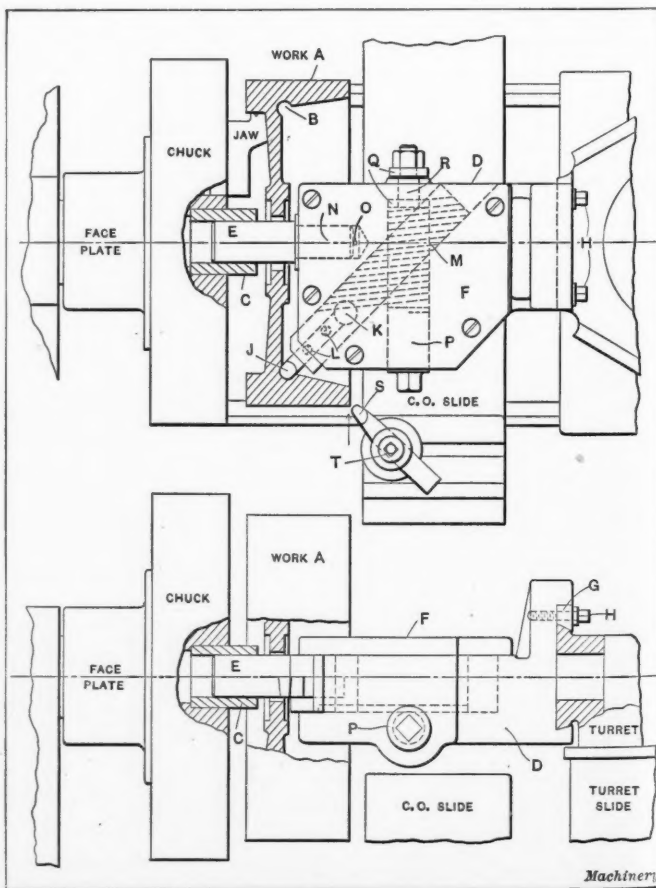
A Recessing Tool used in machining an Automobile Flywheel
